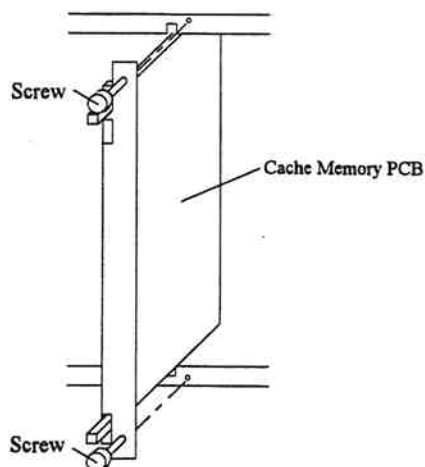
Removal of the Cache Memory PCB
